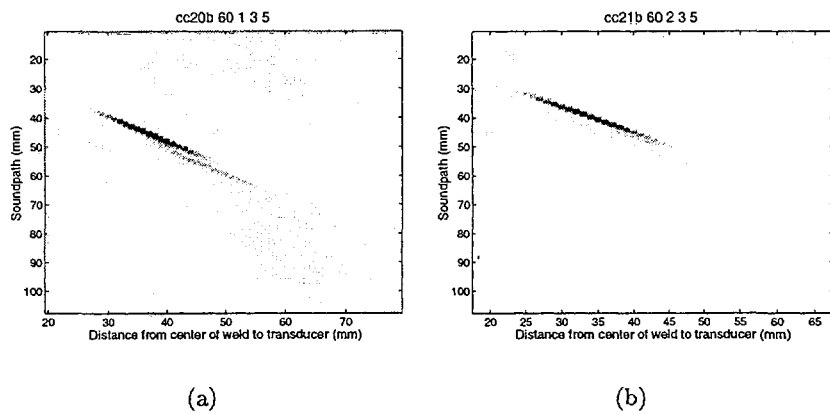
Backside measurements from center cracks using the 60-degree 3.5 MHz transducer (a) 6 mm crack, 26 mm from bottom surface and tilted 2 degrees (b) 3 mm crack, 22 mm from bottom surface, 2 mm from center of weld, tilted 3 degrees.
